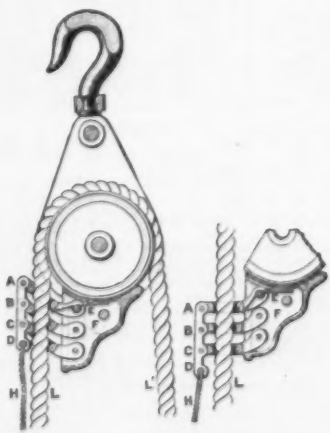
Detail View of Standing Block, with Section of Grip Rings and Attachments.
